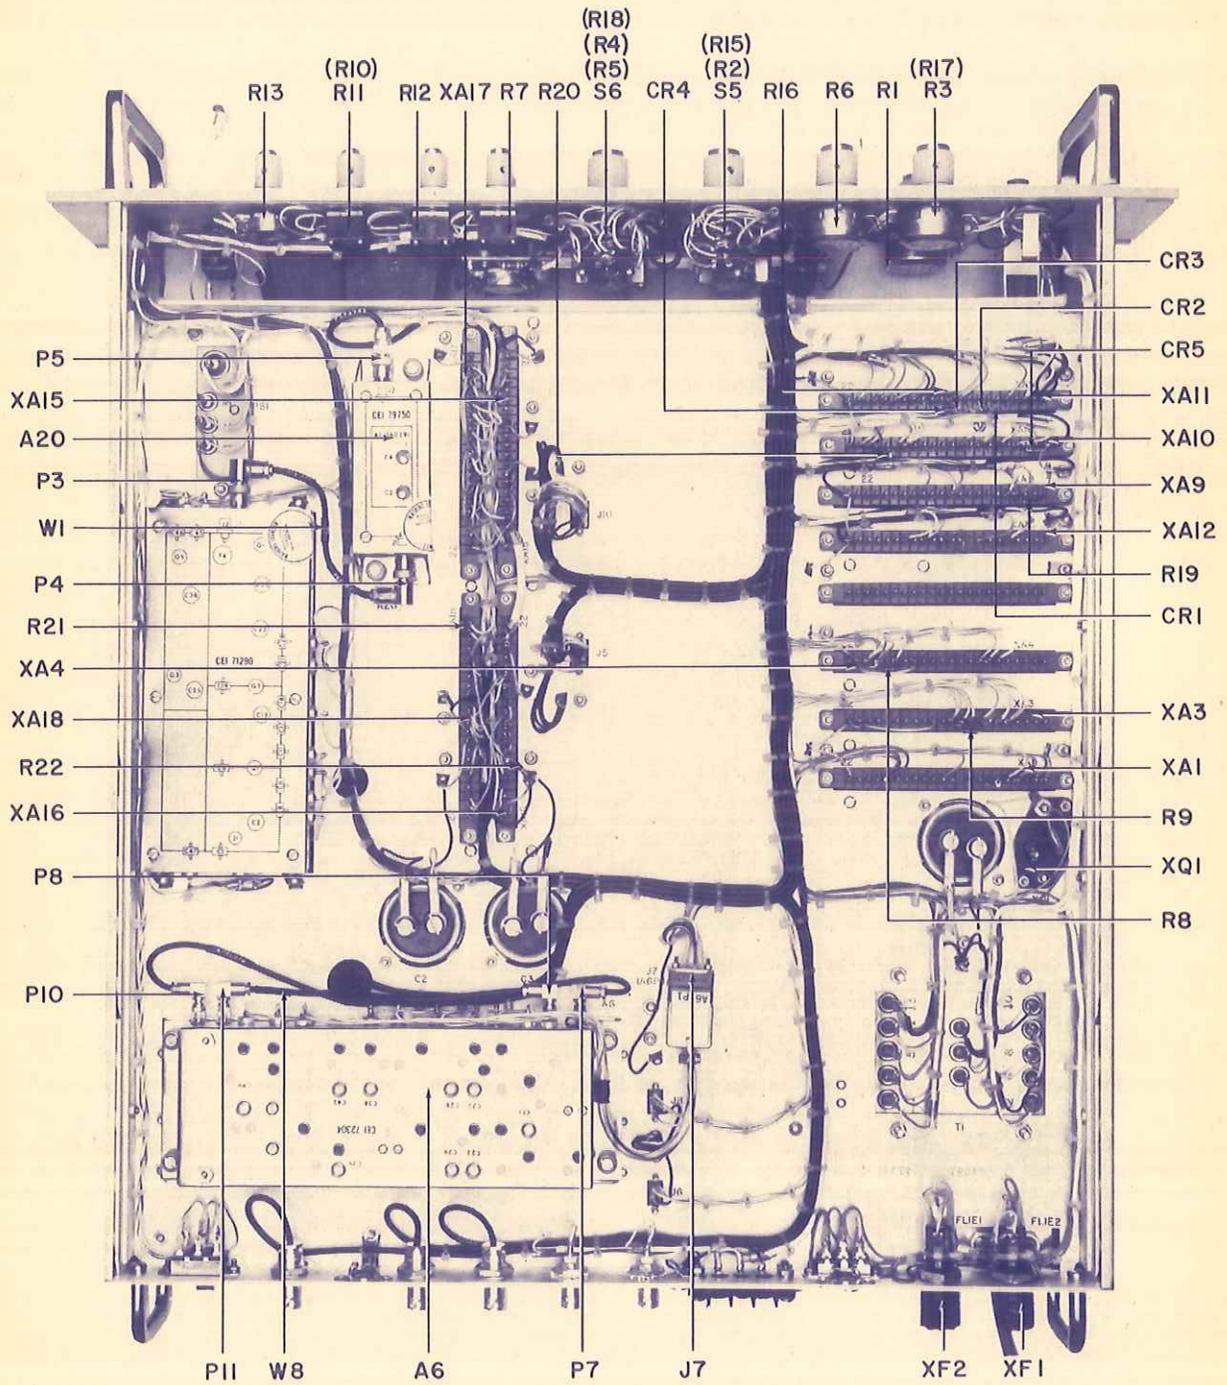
Type DM-112-() Demodulator, Bottom View, Location of Components
